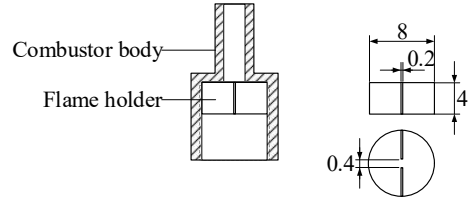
Combustor and double narrow slit flame holder geometry and dimensions
